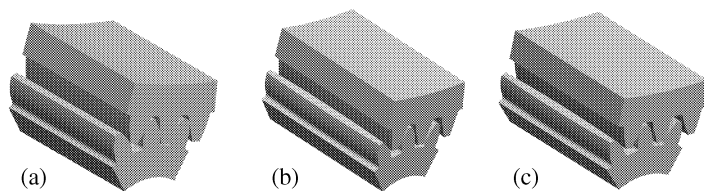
Assembly models: (a) standard gear, (b) circular crowned, (c) involute crowned
